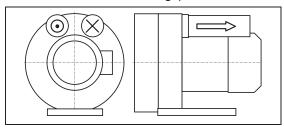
2BH1840-7G... (two-impeller pump-motor unit with double-flow design)
